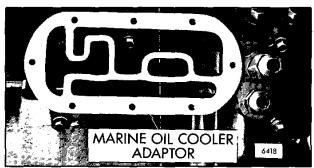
Marine Engine Oil Cooler Adaptor (Lube Lines Disconnected)
